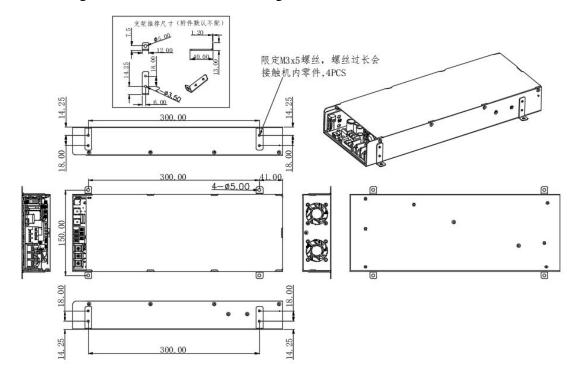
Module Horizontal- Small Bracket Installation Reference Diagram (Unit: mm)
